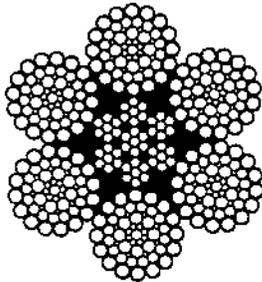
6 x 57 Seale Filler Wire Seale IWRC
